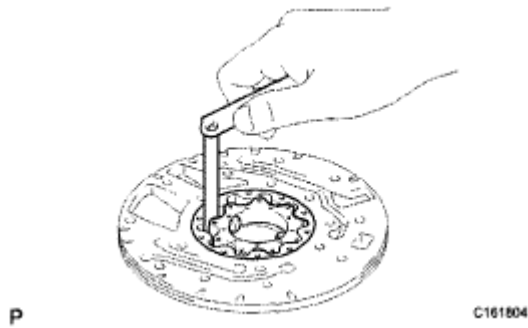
Measuring Tip Clearance Between Driven Gear Teeth And Drive Gear Teeth
